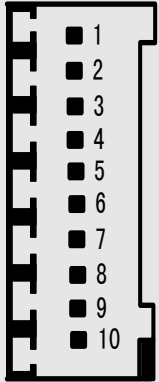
Addresses of Independent-Key Machine Tool Panel (15-inch)
